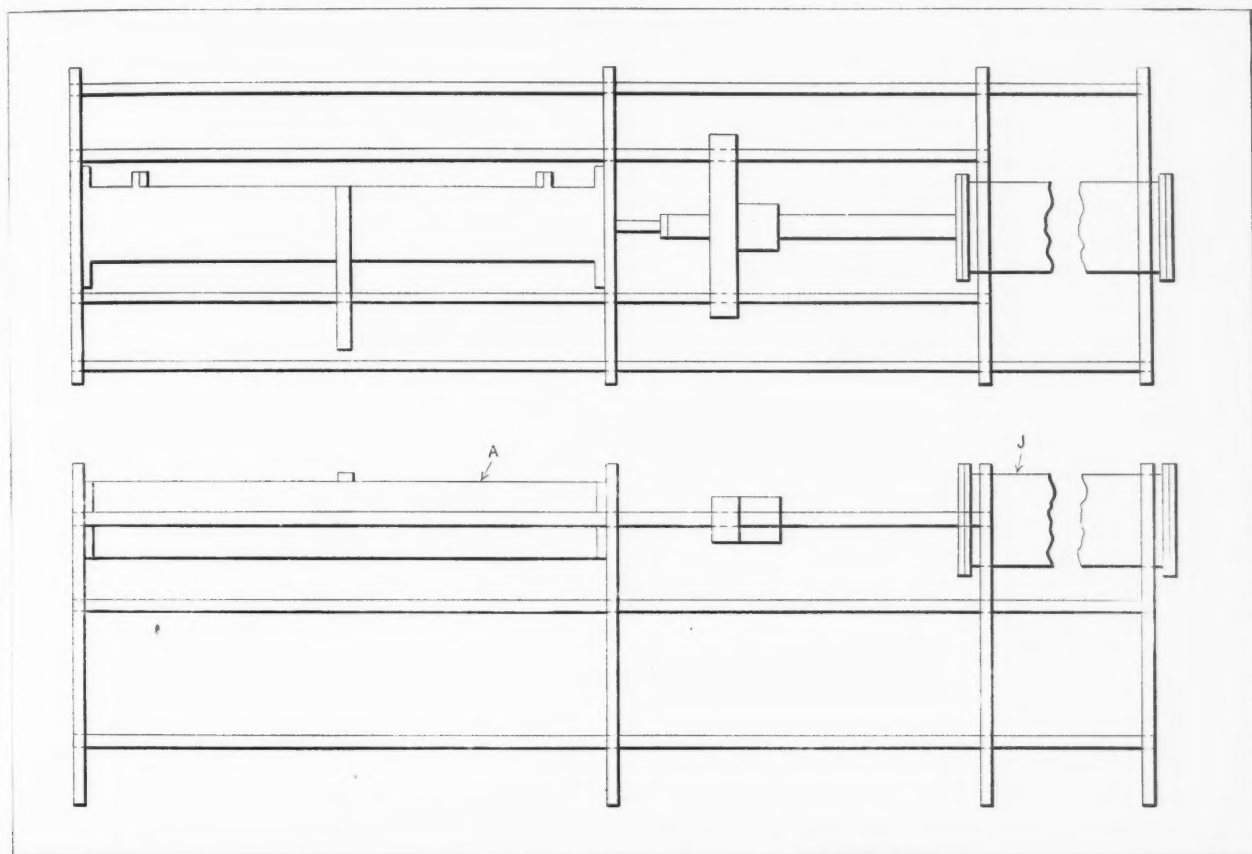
Machine in which Fins are Assembled Pneumatically on Radiator Tubes
